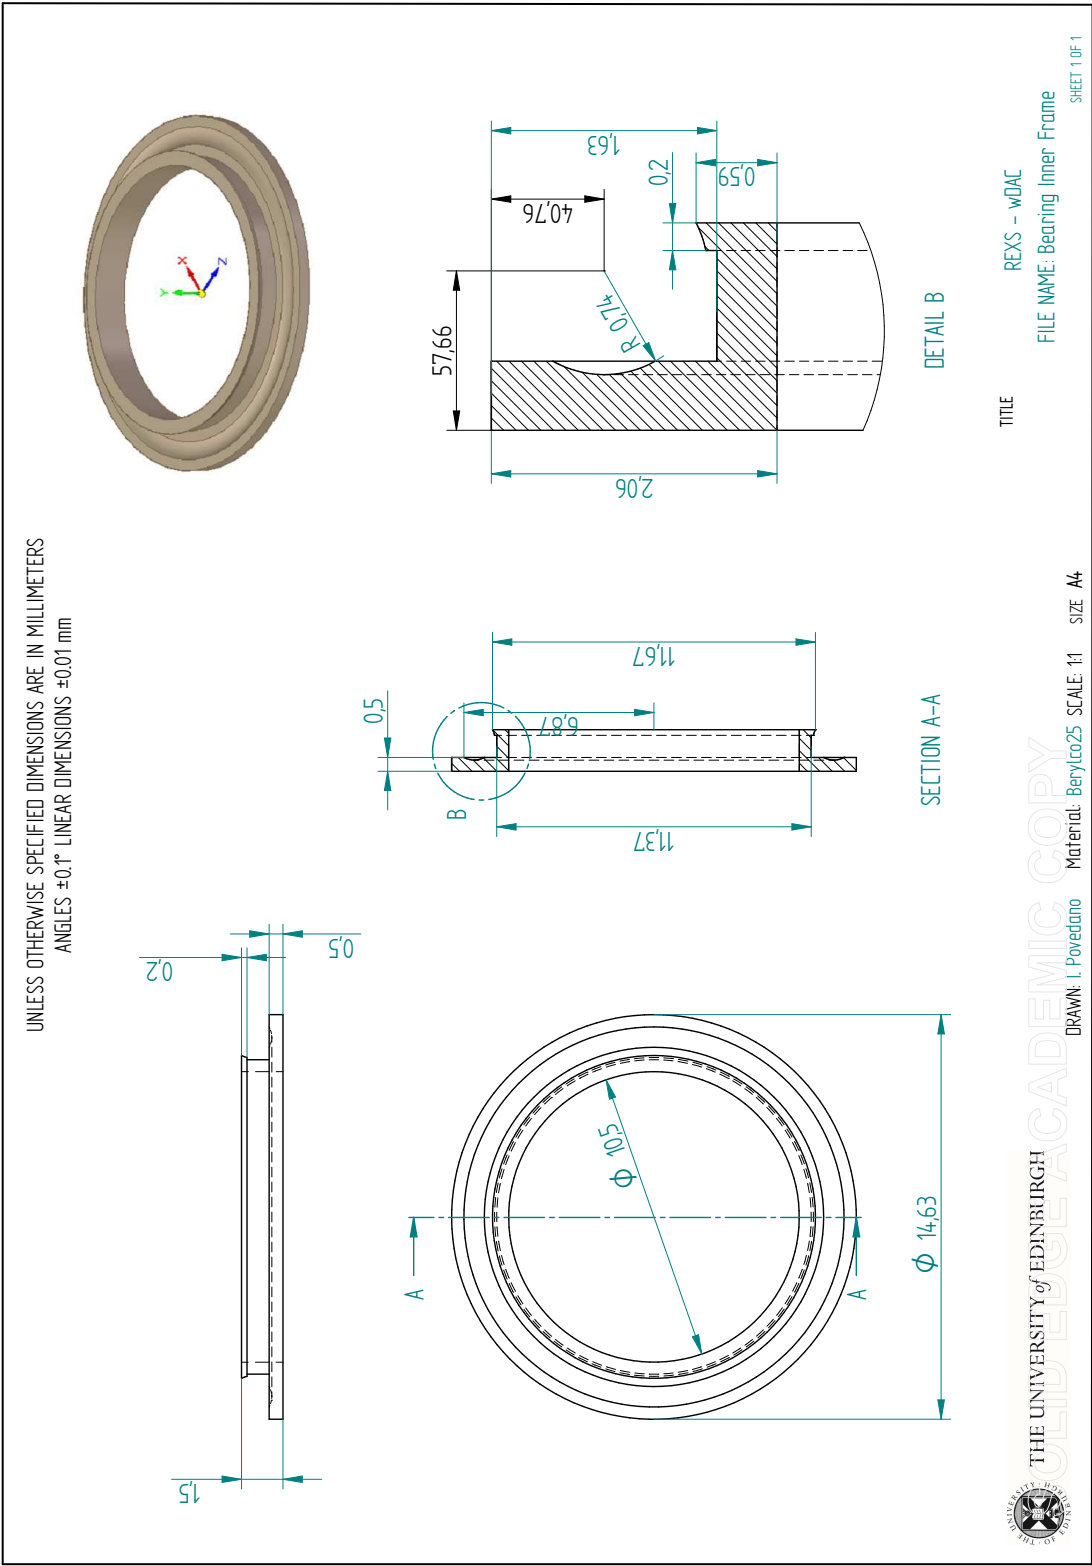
Inner bearing frame. Sheet 1 of 1.
